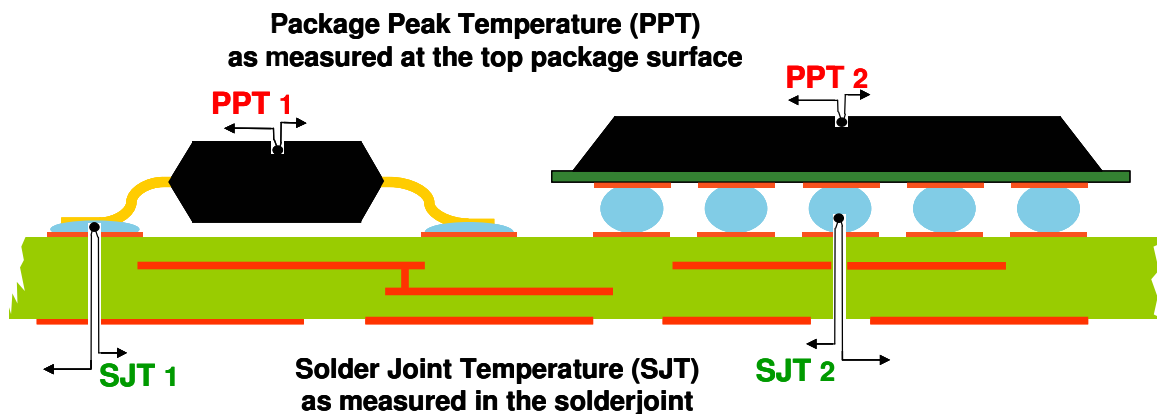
During board soldering the minimum solderjoint temperature (SJT) has to be reached for good solderjoint formation AND the specified package peak temperature (PPT) must not be exceeded for any component on the board for proper package integrity.
